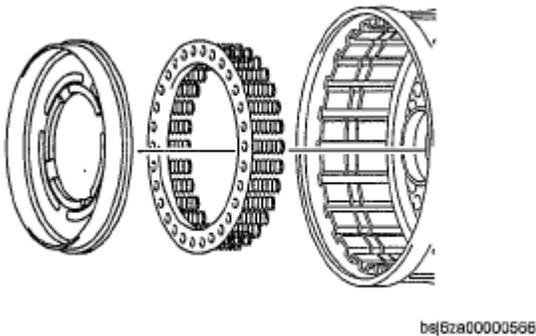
Identifying C2 Clutch Seal Plate And C2 Clutch Piston Return Spring
